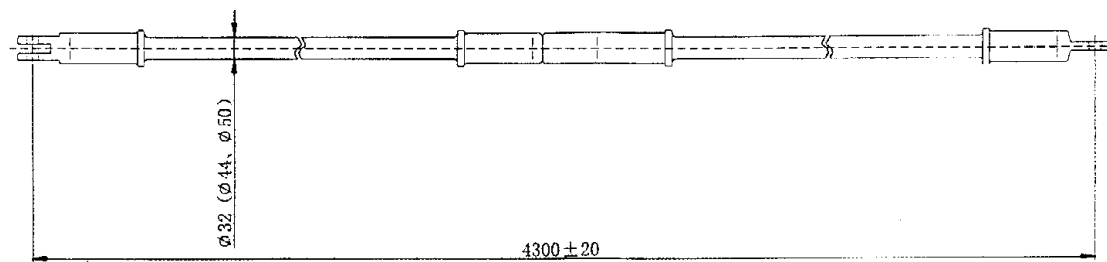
General assembly drawing of JYLG-500kV/160~530kN conventional type insulation operation rod
